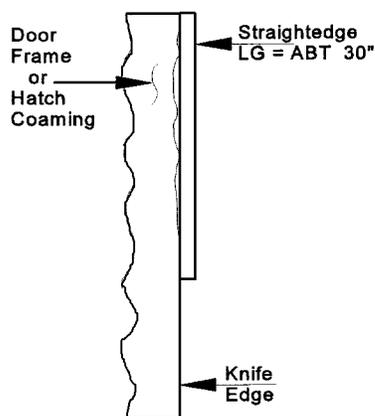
Knife-Edge Inspection Using Straightedge Method
